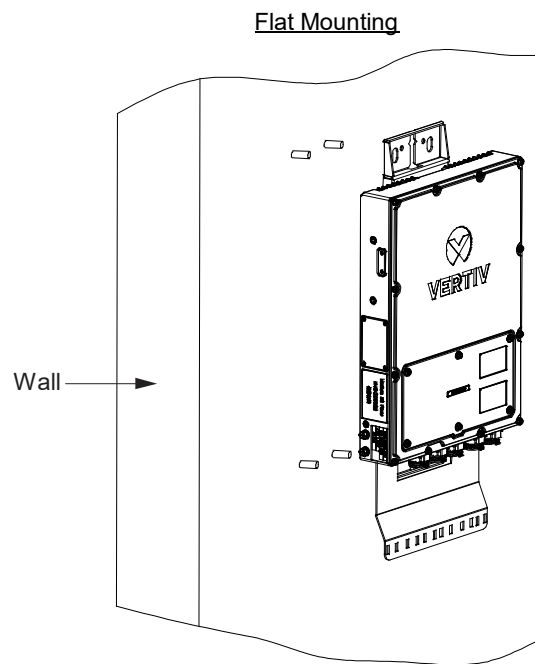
Installing the Top and Bottom Mounting Brackets and Strain Relief Plate to the Rectifier (cont'd on next page)
